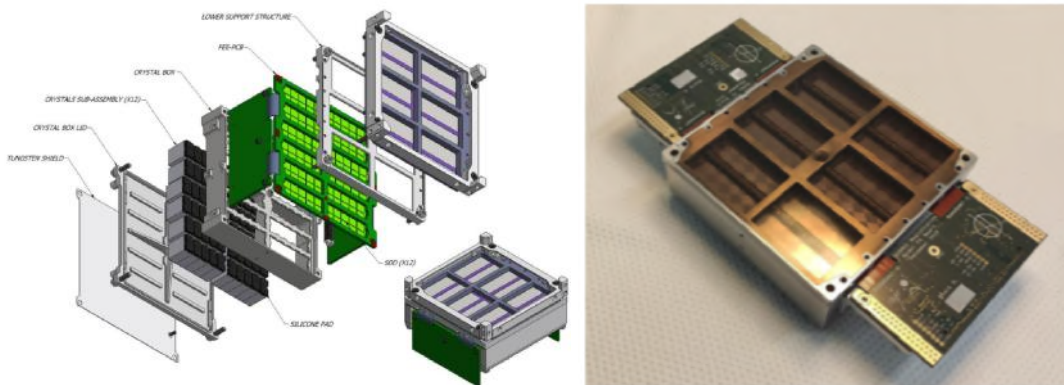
Left: Exploded view of the payload unit on board the HERMES nanosatellite. Right: Integrated detector assembly.
